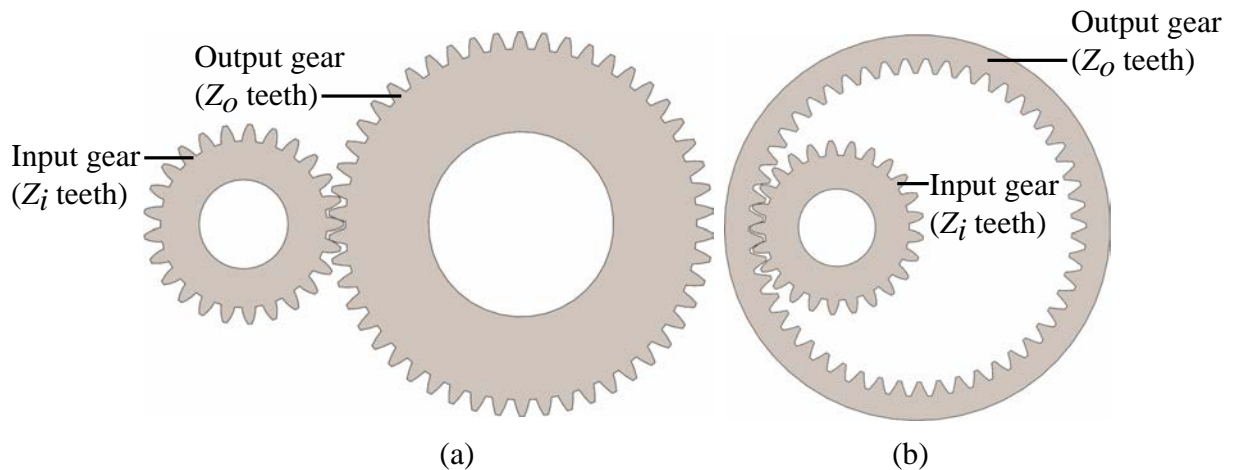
Spur gears. (a) Two external gears. (b) An external gear and an internal gear.
